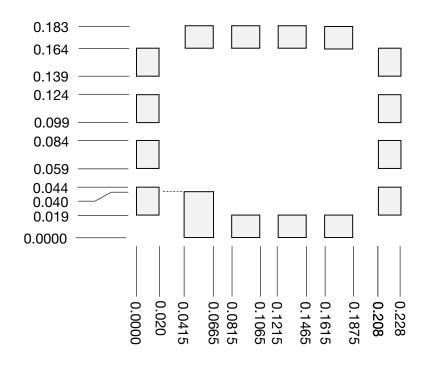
Recommended PCB Solder Pad Configuration (Top View)
